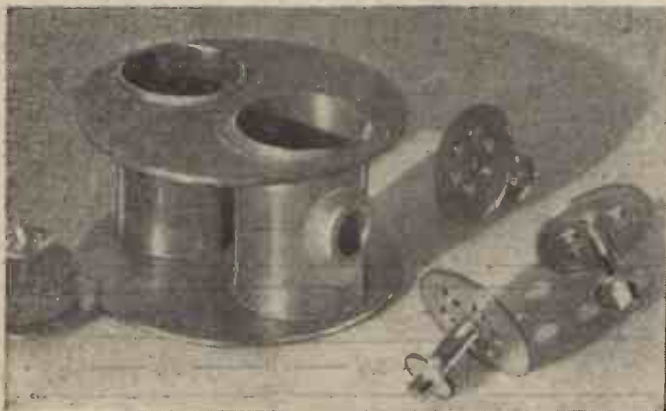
Valve chambers, supporting plates, and valve seatings and guides.
